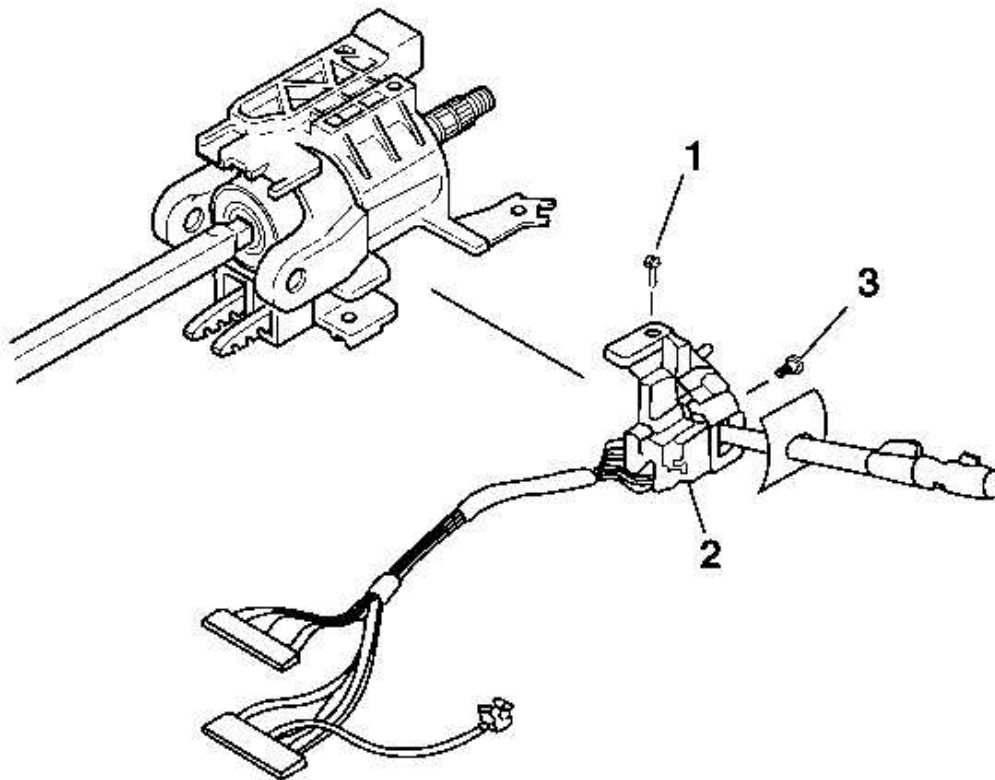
View Of Turn Signal & Multifunction Switch Assembly
